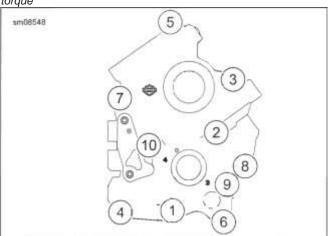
Cam Support Plate Tightening Sequence sequence.
